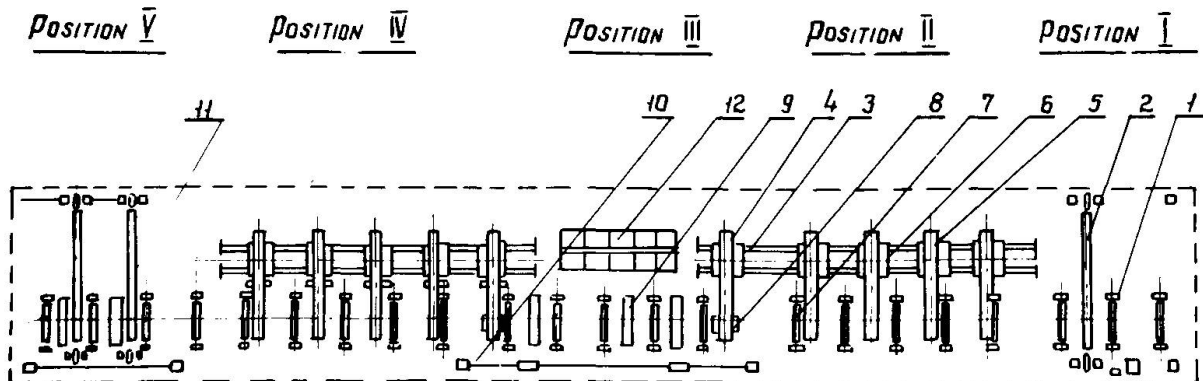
Lay-out of flow line for completing processes of crane-girder fabrication: 1 - roll-table; 2 - conveyor; 3 - stock; 4 - edge-plate positioning and clamping device; 5 - stiffening-ribs in-feed and welding set-up; 6 - stiffener infeed device; 7 - roll-table; 8 - pneumatic lifter with clamp; 9 - tilter; 10 - metal member for semi-automatic equipment over hang; 11 - tilter; 12 - welding machine rectifier.
